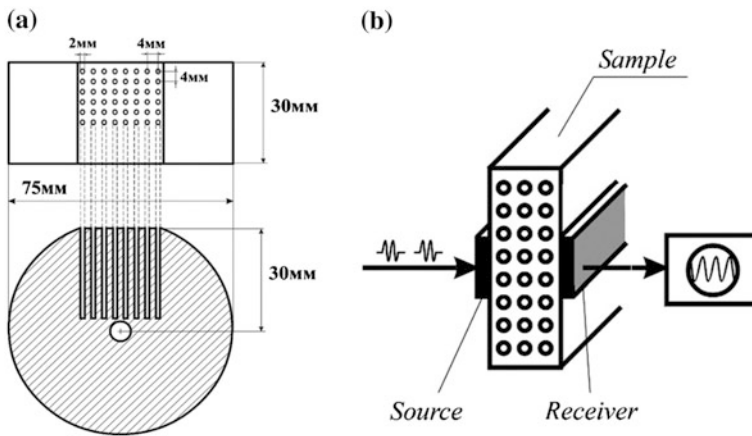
Steel sample with cylindrical holes and the through-transmission technique for the measurements
